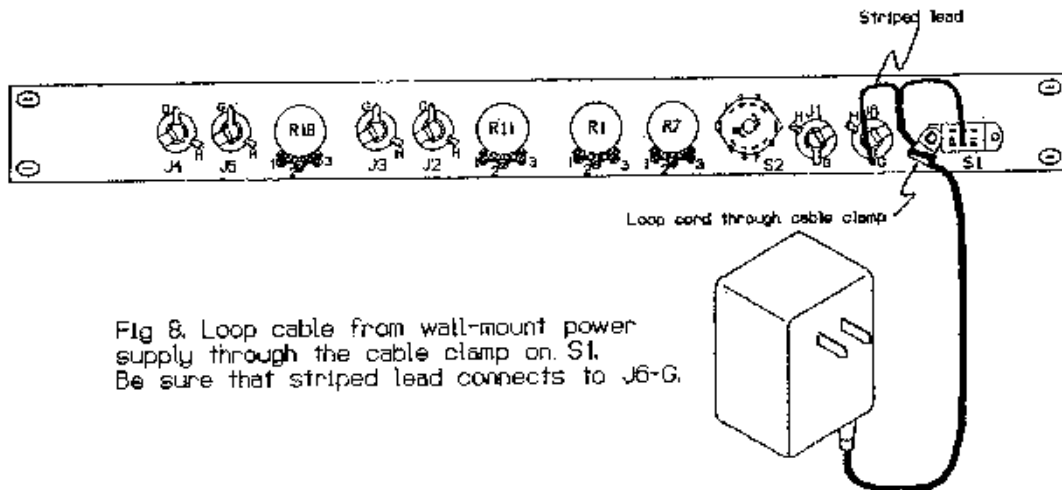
Loop cable from wall-mount power supply through the cable clamp on S1. Be sure that striped lead connects to J6-G.
